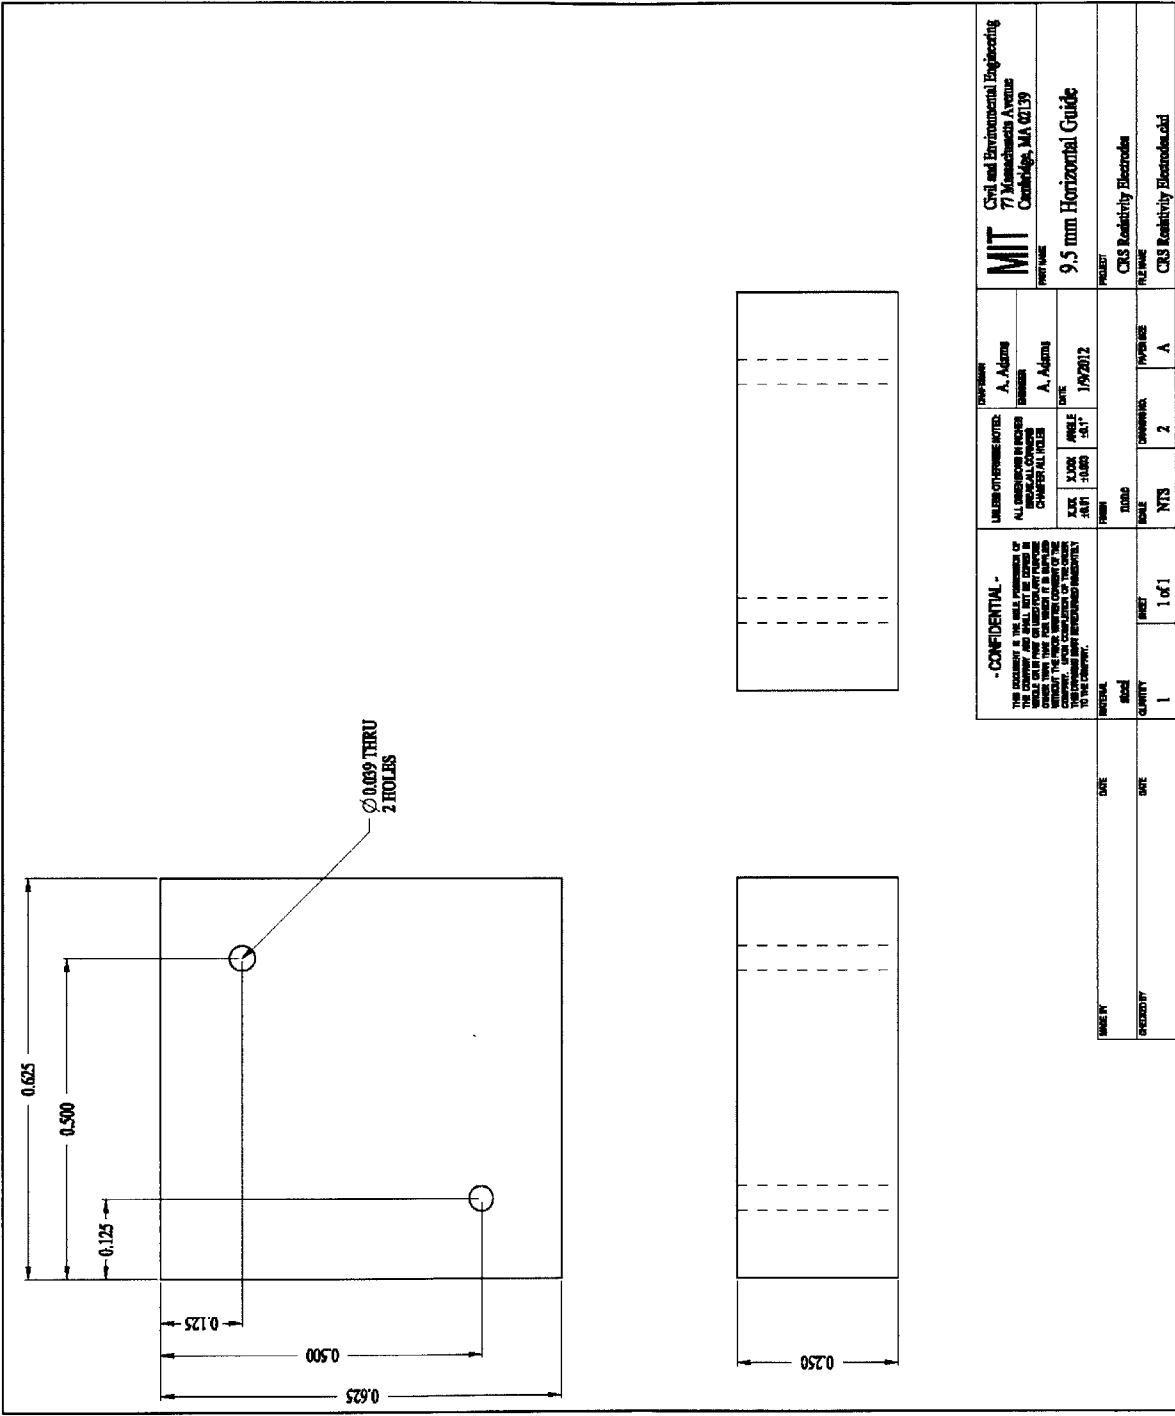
CRS Electrodes: Drawing 2, 9.5 mm drilling guide
